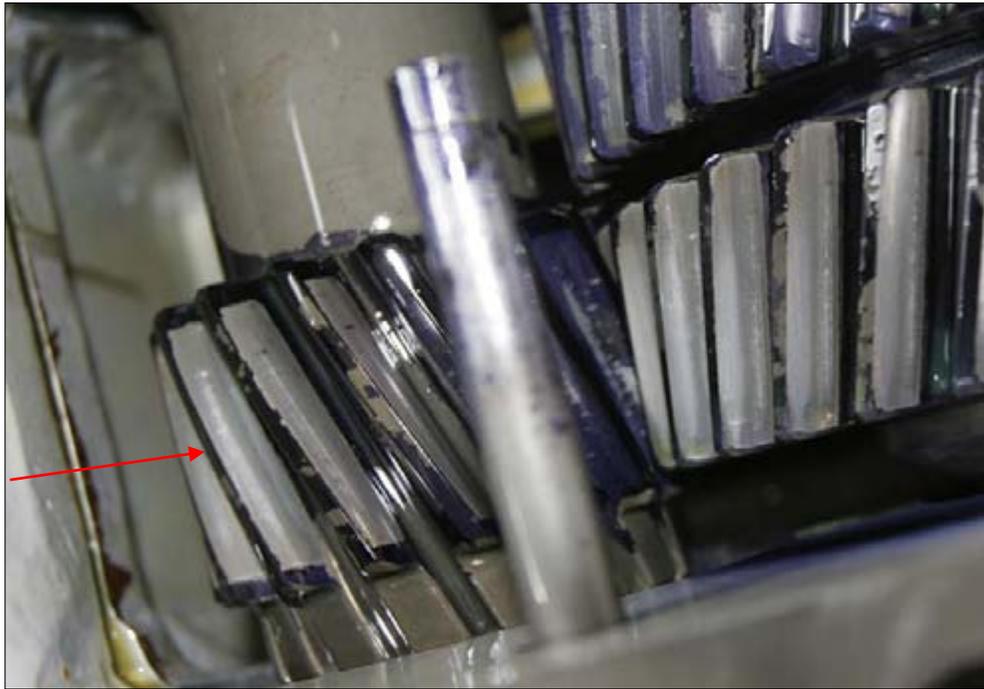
Example of the full load (7,000 lb-in) contact—involute gears
